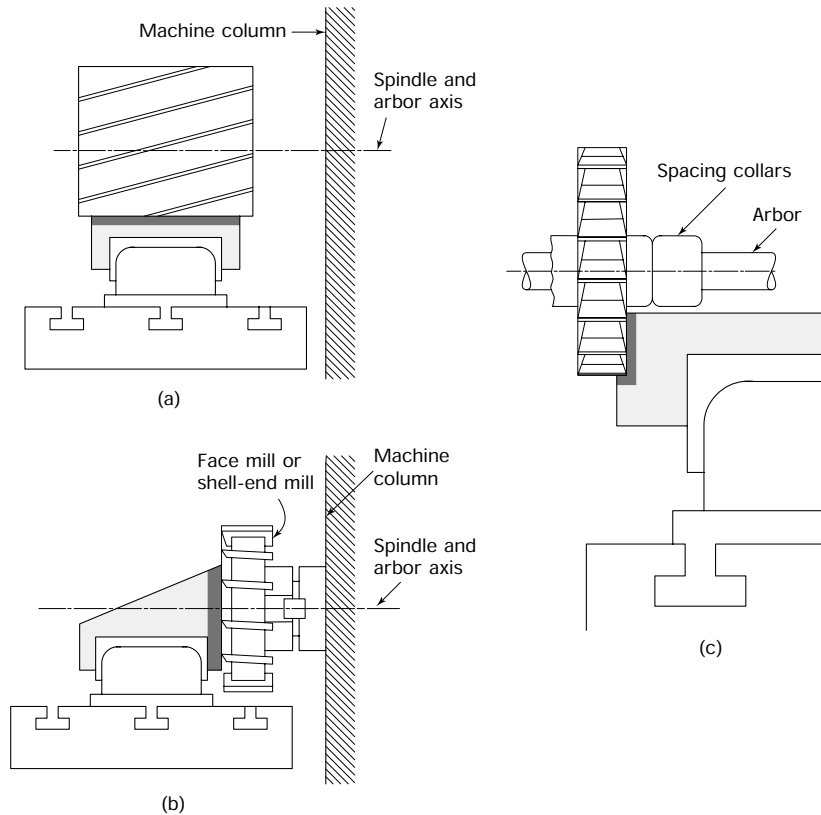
Surfaces parallel and perpendicular to the worktable (horizontal milling machine): (a) use of a slab mill to machine a surface parallel to the milling machine table; (b) use of a face mill or a shell-end mill to machine a surface perpendicular to the milling machine table; (c) use of a side and face milling cutter to machine a surface perpendicular to the milling machine table – the depth of the perpendicular surface is limited by the relative diameters of the cutter and spacing collars
